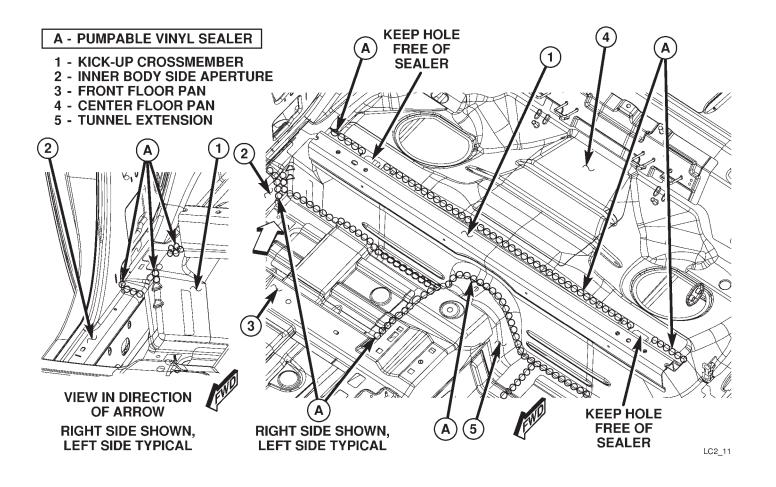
KICK-UP CROSSMEMBER/FLOOR PAN
